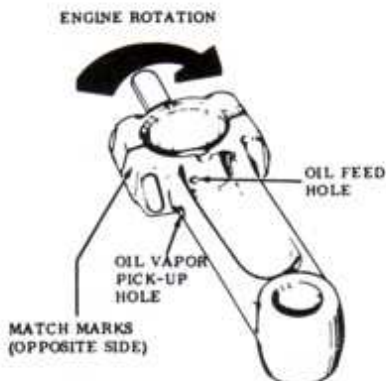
Connecting rods used on Models VH80 and VH100 have two oil holes.
